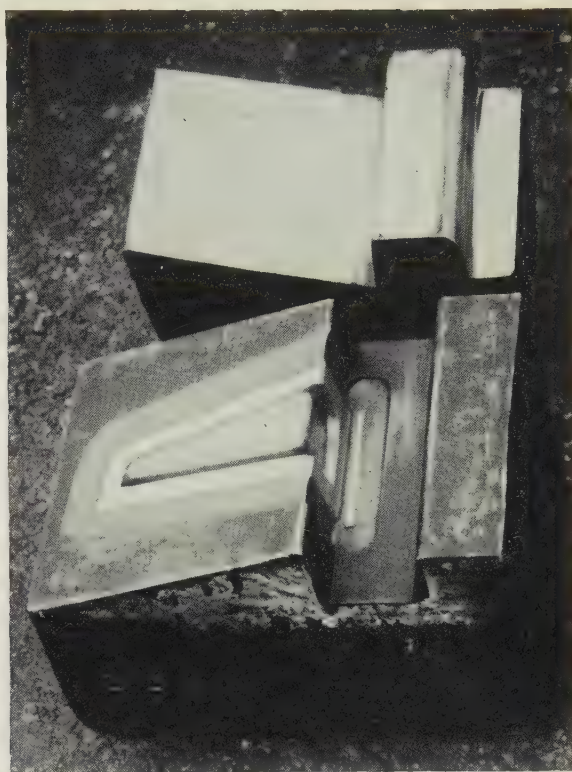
Forging Dies with "Stepped" Parting-Line.
